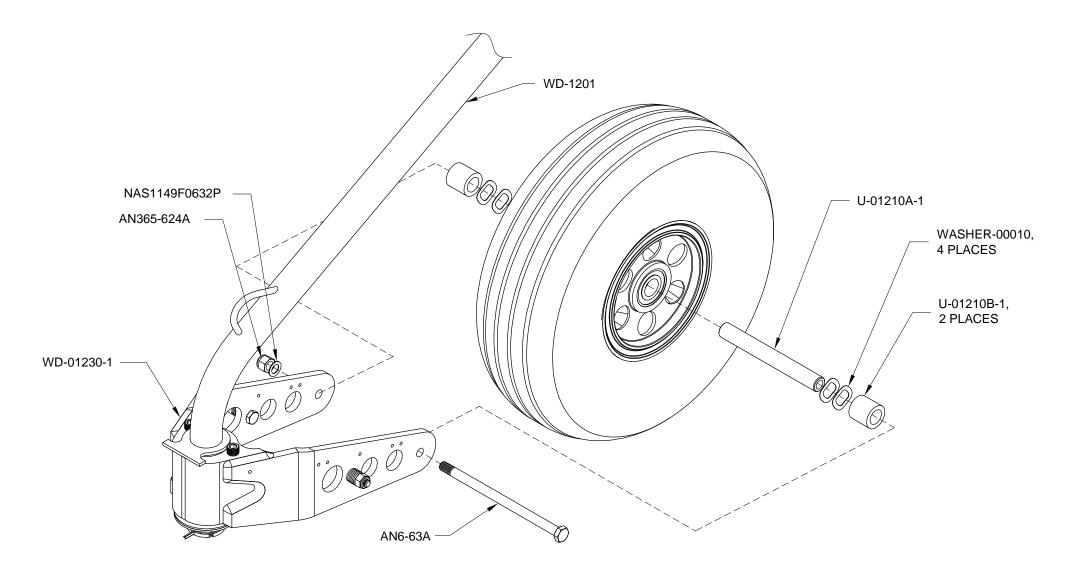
INSTALLING THE NOSE WHEEL & TIRE ASSEMBLY
